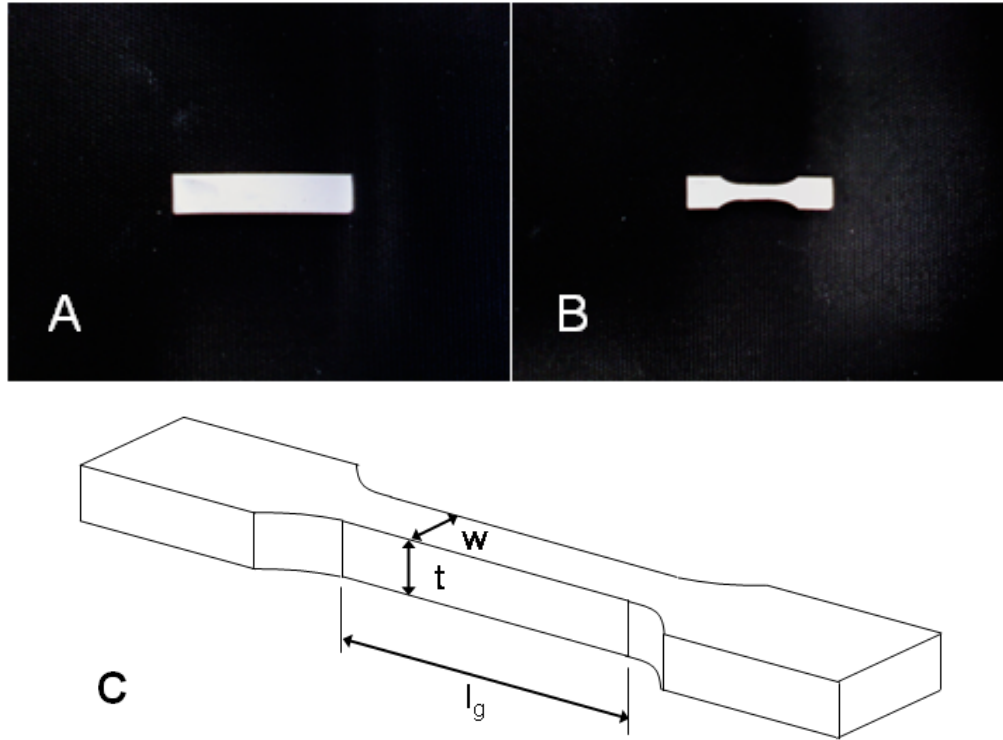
HAp/C composite dogbone mechanical test specimen preparation. As molded 5 x 5 x 30 mm HAp/C specimen (A). Machined dogbone mechanical test specimen (B). Schematic drawing of the dogbone mechanical test specimen dimensions (C).
